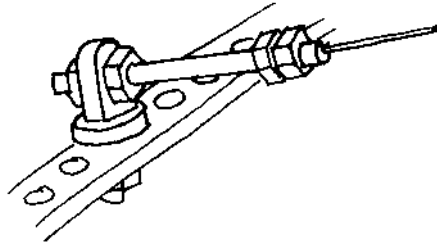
Detailed illustration of the assembly of the grooved, threaded rod shown in Figure 3.1.
